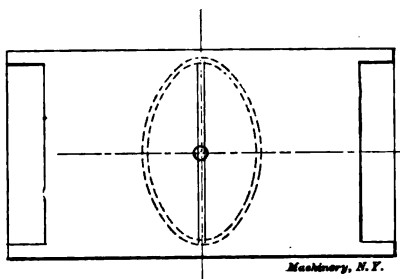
Development of Cap, showing Oil Grooving and Counterboring.
